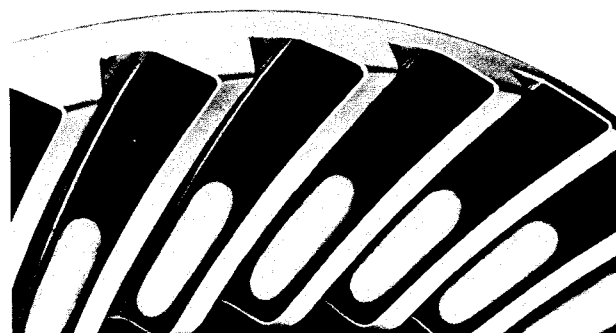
Ring Gear and Drive Pinion Movement to Obtain Correct Tooth Contact Pattern
